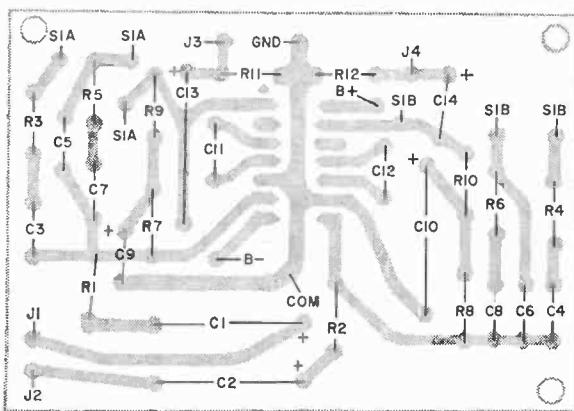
An actual size printed circuit etching guide is shown above; at left is guide to component placement and orientation as viewed from the top of the board. Note: align pin L of integrated circuit with hole located directly below R11.
